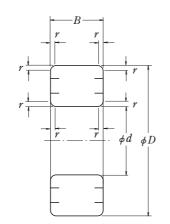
Boundary Dimensions of Radial Ball and Roller Bearings
